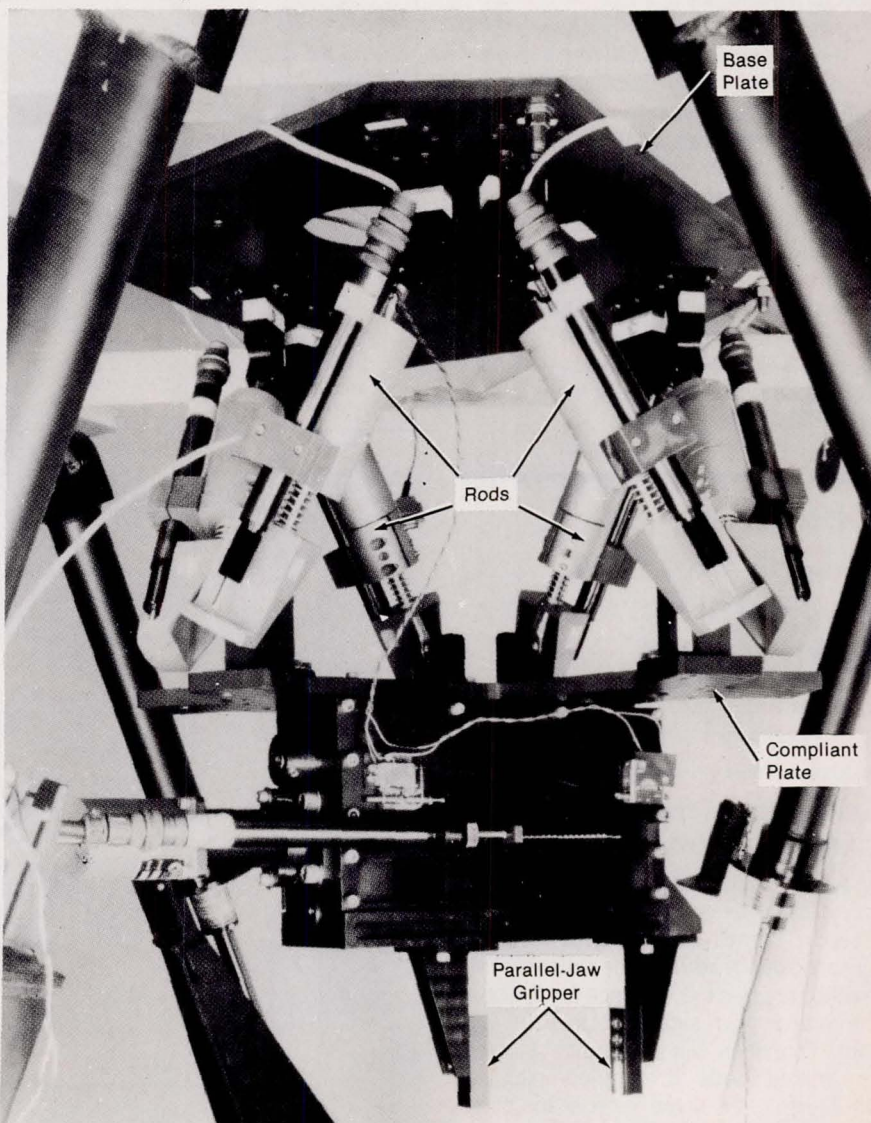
A Parallel-Jaw Gripper is mounted on the compliant plate of the compliant-wrist assembly.
